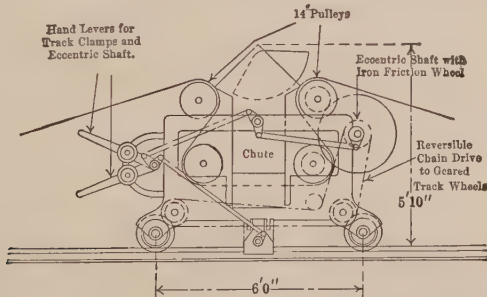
4-pulley Tripper for Reversible High-speed Grain Conveyor.
